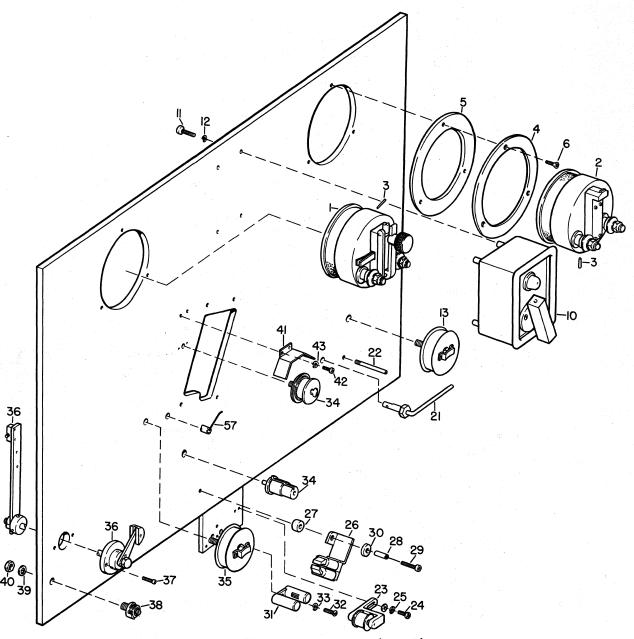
C 50I 945 00 TAPE PANEL ASSEMBLY (FRONT) EXPLODED VIEW
